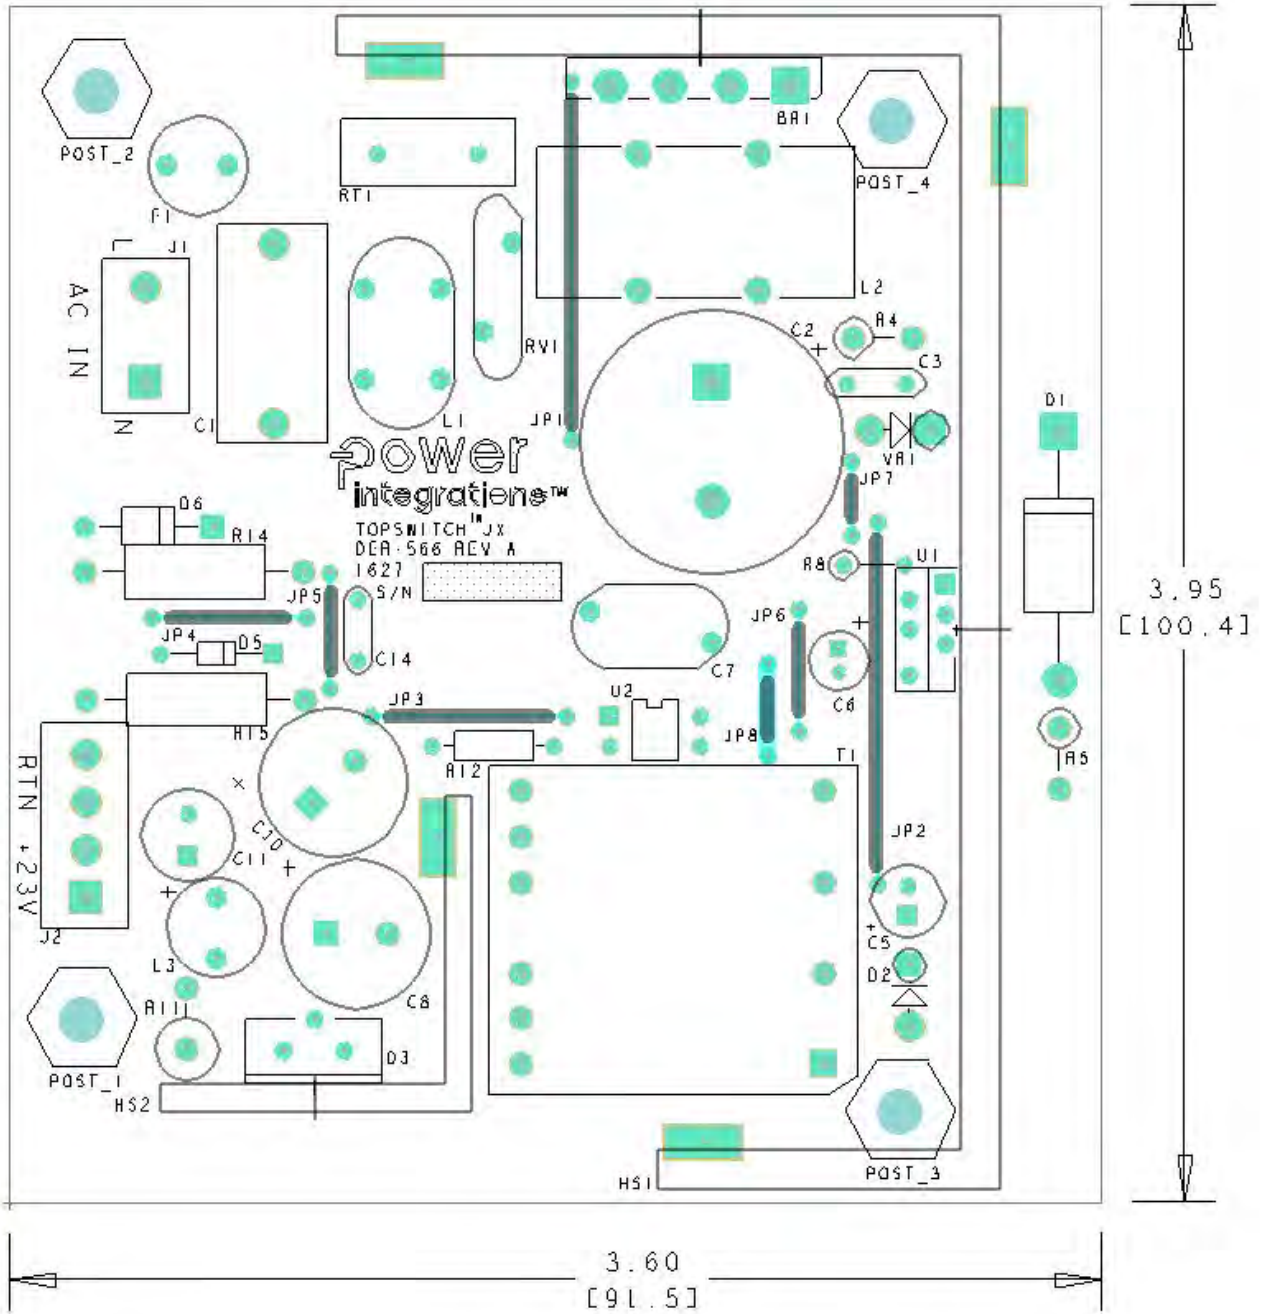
Printed Circuit Layout, Showing Top Side Components.
